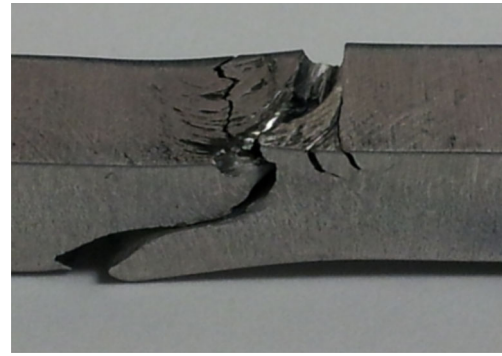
Fracture zone under the tool pin in sample 3n (hot weld); notice the delaminated regions in vicinity of the weld line
